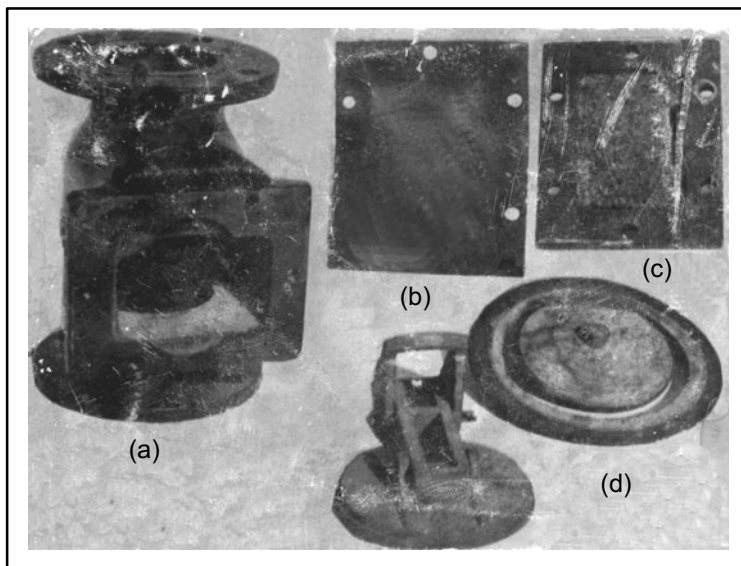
Exploded view of a reflux valve provided with inspection plate: (a) Valve body, (b) Gasket, (c) Inspection plate, (d) Flexible member of flap valve, (e) Flap valve with bottom plate
